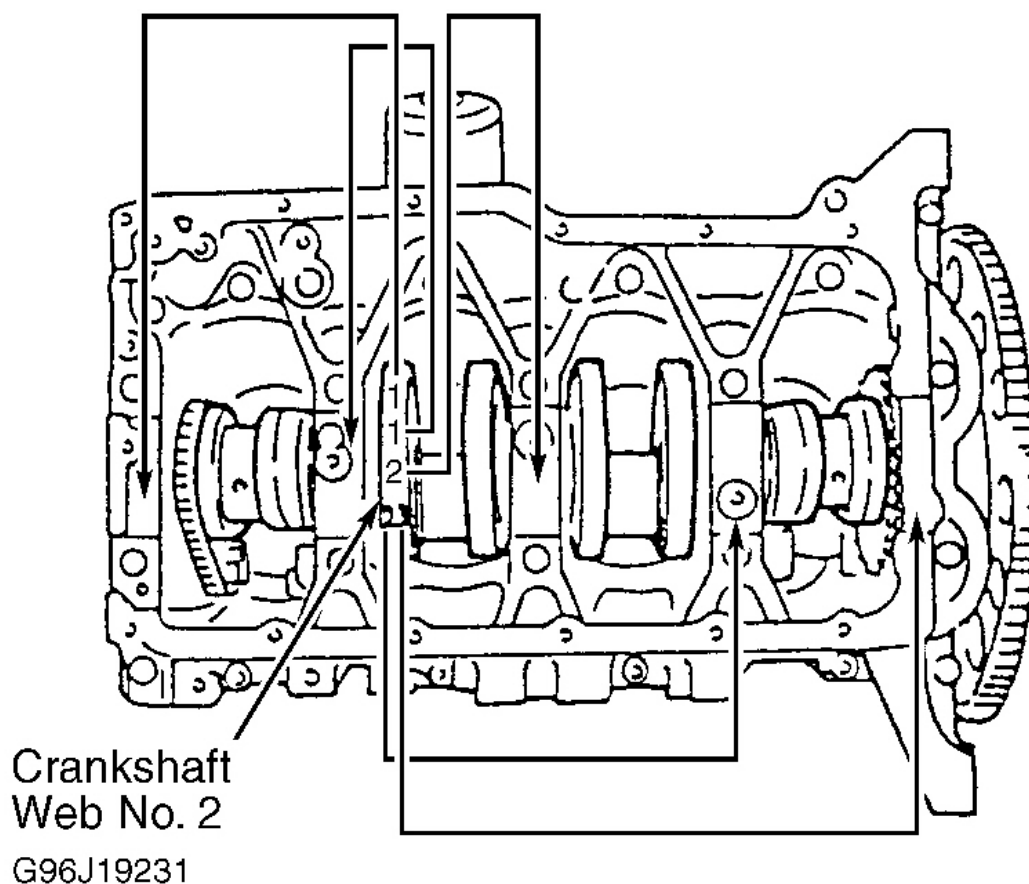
Locating Main Bearing Journal Diameter On Crankshaft Web No. 2
